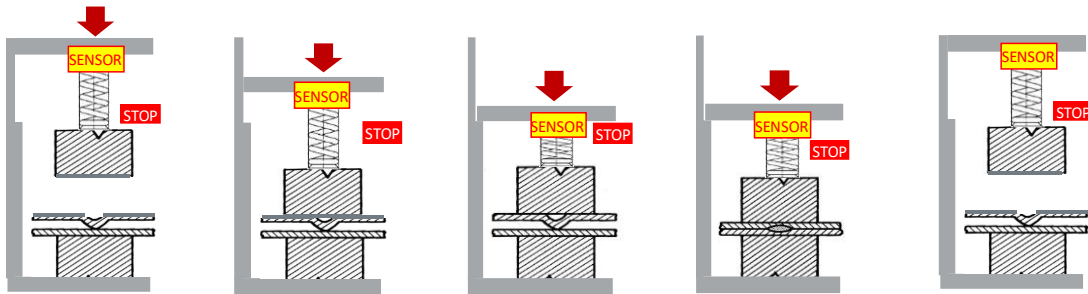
1 Upper weld head moves down. 2 The weld head touches the lower electrode. 3 Electrode force is applied through the spring system until the mechanical stop is hit. 4 Welding current is applied, follow-up occurs, and a weld is made. 5 Upper electrode arm moves upwards. Pictures provided by Arplas.
